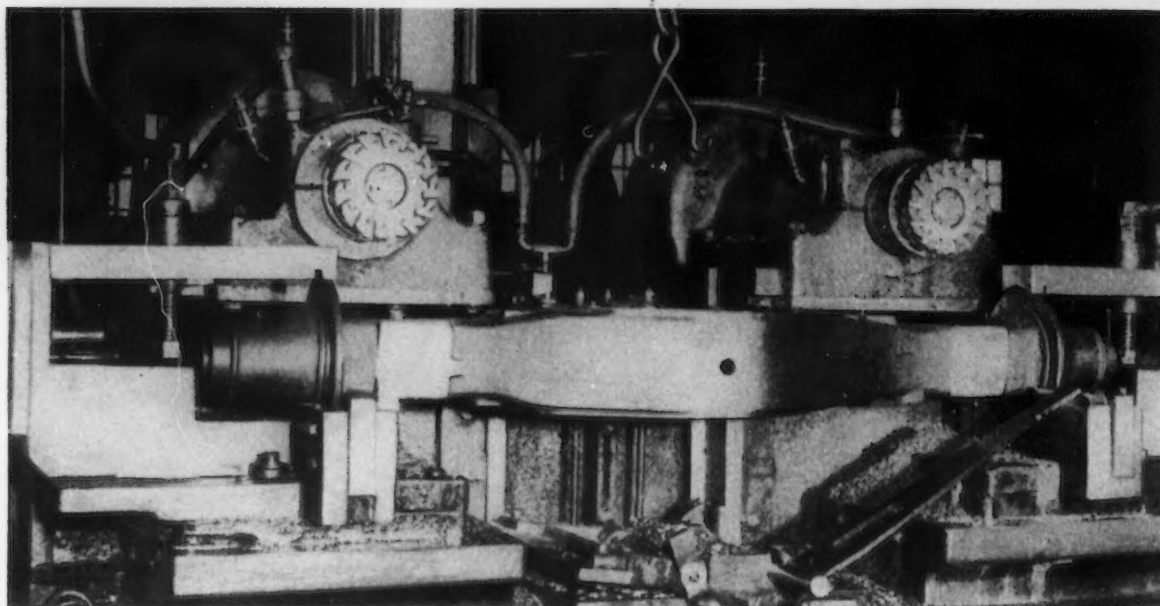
Bracket pads on this motor truck axle are milled at a speed of 345 sfpm with a cutter feed rate of 35 ipm and a depth of cut of $\frac{1}{4}$ to $\frac{3}{8}$ in.
